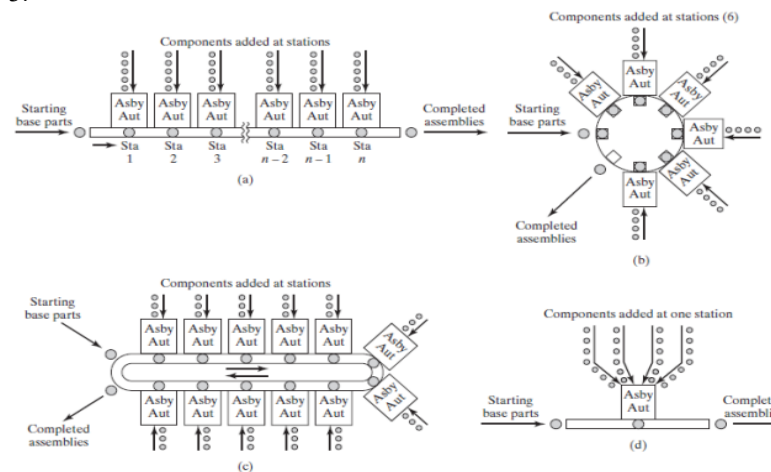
Automated Assembly Line (Source: Groover, 2014)
